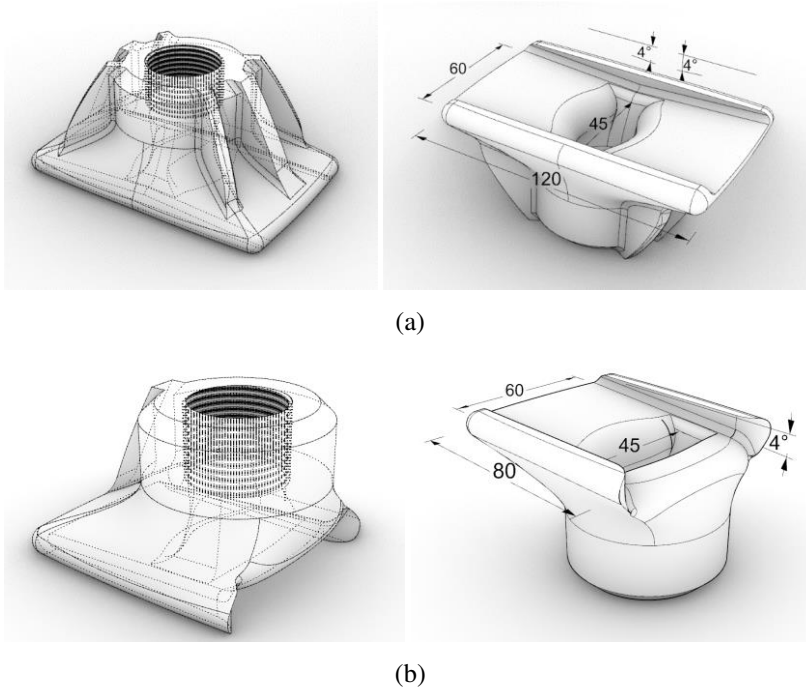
Schematic view and dimensions (mm) of nozzles, (a) for the continuous printing and (b) for the one-way printing.
